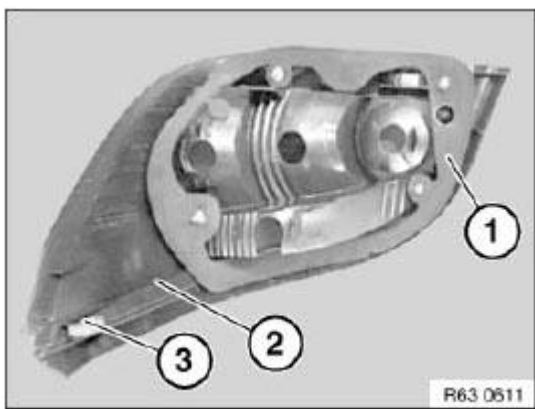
Identifying Rear Light Seal And Buffer Stop
